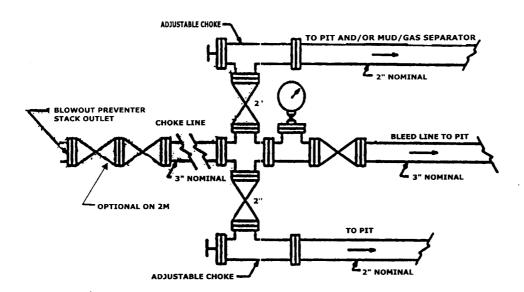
Typical choke manifold assembly for 2M and 3M rated working pressure service - surface installation.
